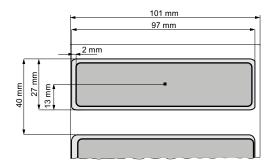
Dimension drawing SIMATIC RF630L 6GT2810-2AB02-0AX0
